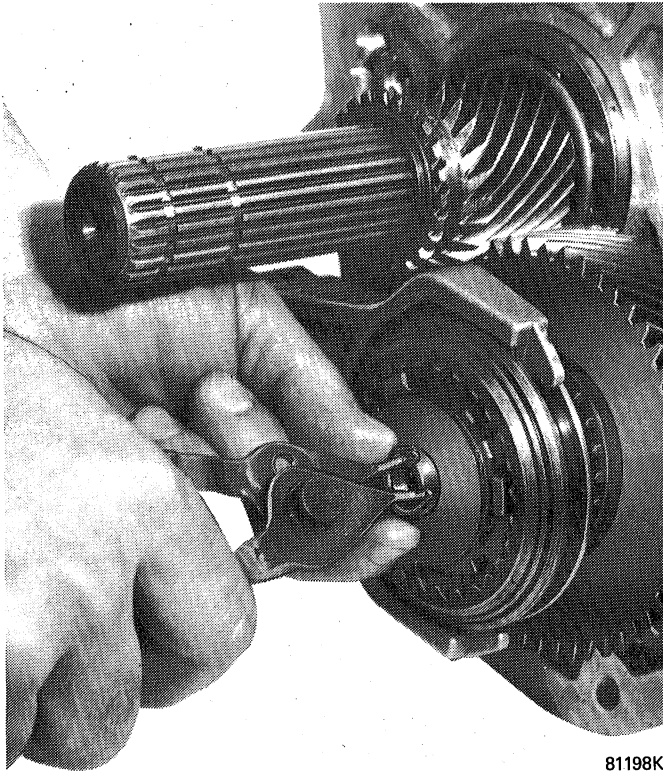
B-42 Fifth Gearshift Fork Roll Pin Removal/Installation
